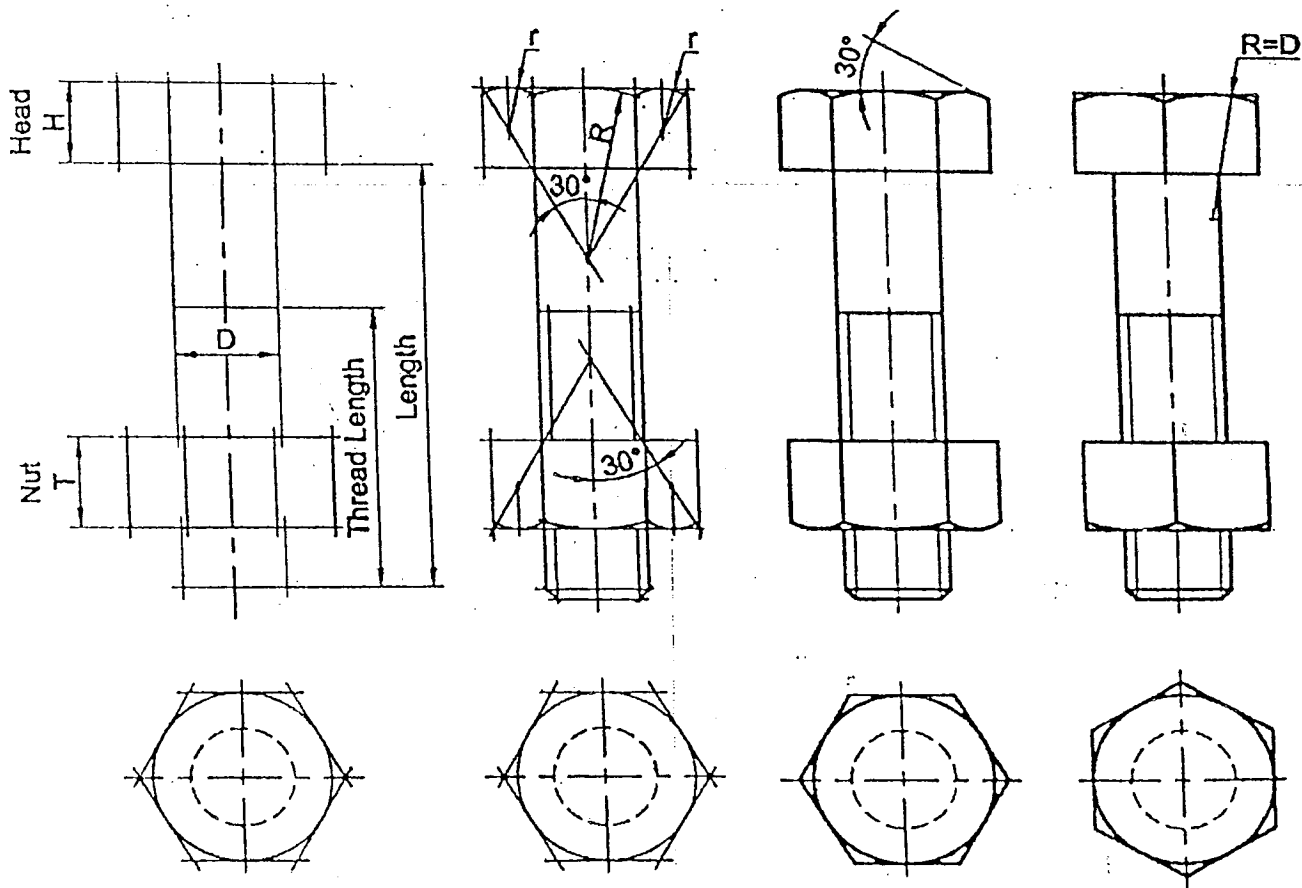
Procedure of Drawing Hexagonal Head Bolt and Nut
